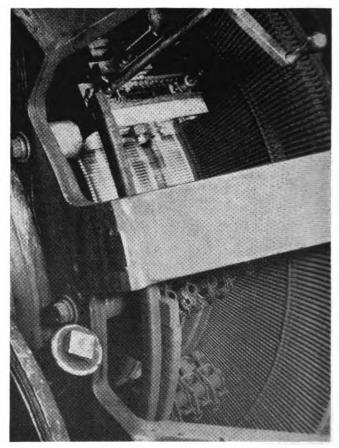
(left)—A jig mounted on the generator base supports a bearing which takes the place of the bolted engine connection
